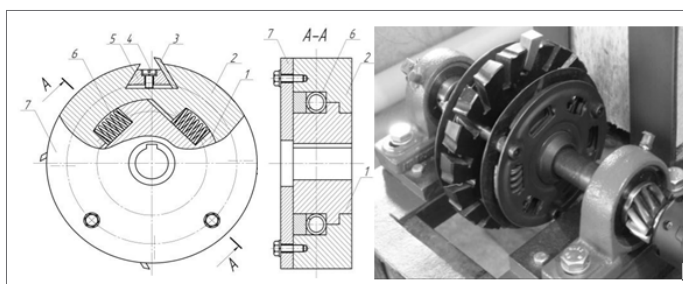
Drawing of the structure and a photo milling rotor. 1: a rotor housing; 2: the toolholder; 3: cutting tool; 4: screw; 5: Wedge; 6: a spring steel; 7: drive.
